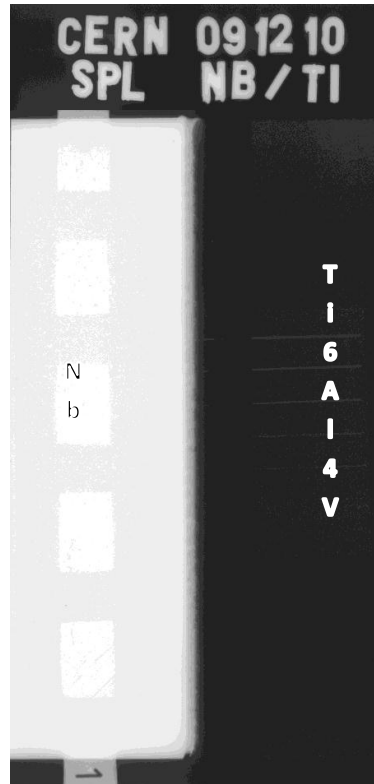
X-ray radiography of the weld showing niobium on the left (bright) and titanium on the right (dark)
